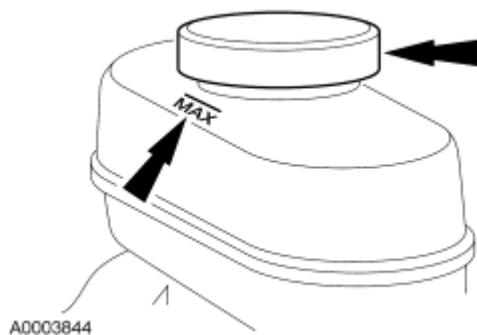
Identifying Brake Master Cylinder Fluid Reservoir Cap And Max Fill Line
